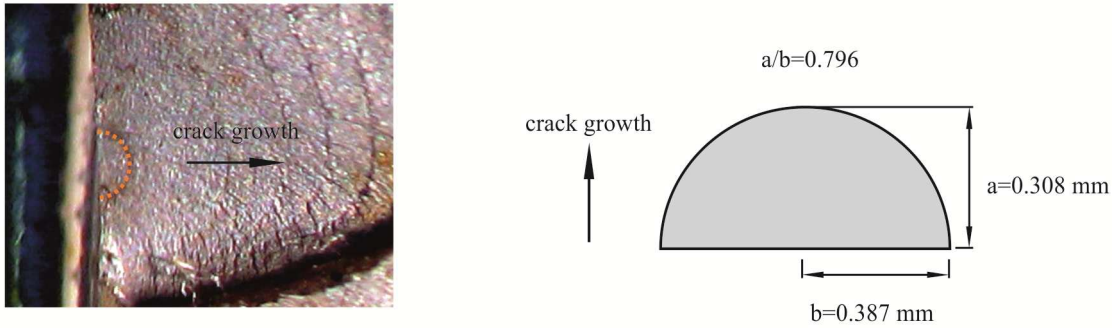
Detail of crack front marks obtained in a test performed under in-phase combined bending-torsion loading (Specimen reference: BT-m).
